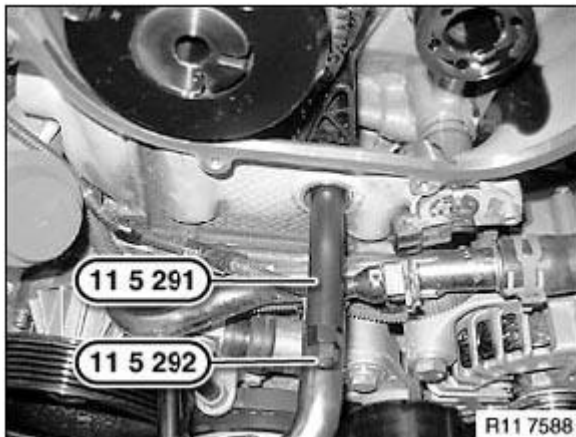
Identifying Special Tool (11 5 291 And 11 5 292)
